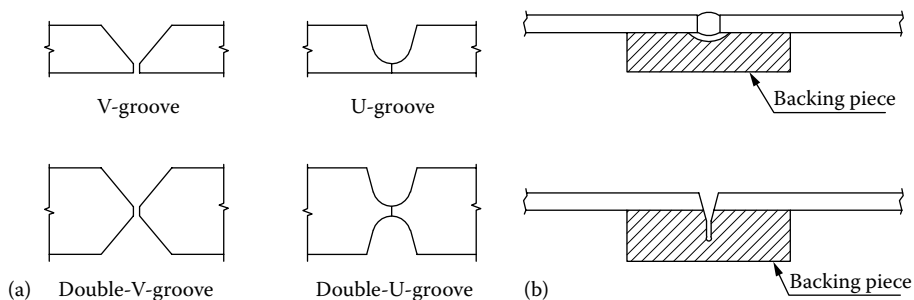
Nickel welding: (a) joint design and (b) groove in backup bar.
